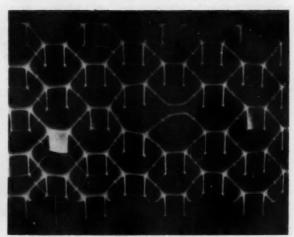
DETAILED PARTS are assembled into kits and given a prefit assembly to determine matching of the parts, then transferred to final assembly. Here is the assembly fixture with core in position.
